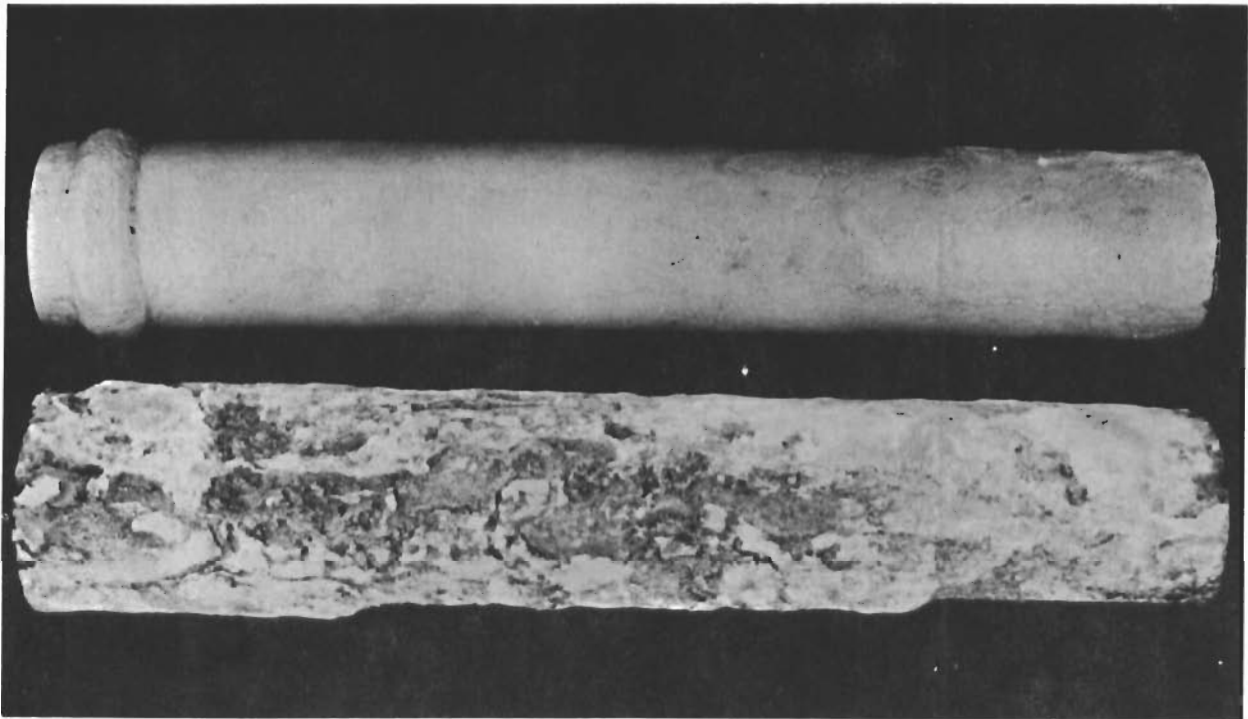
Furnace Tubes from Mercury Boiler. Top Tube is Coated with High-Vanadium, High-Sulfur Slag. Bottom Tube, Containing Weld, was Grit Blasted; it Shows Evidence of Mild Attack
